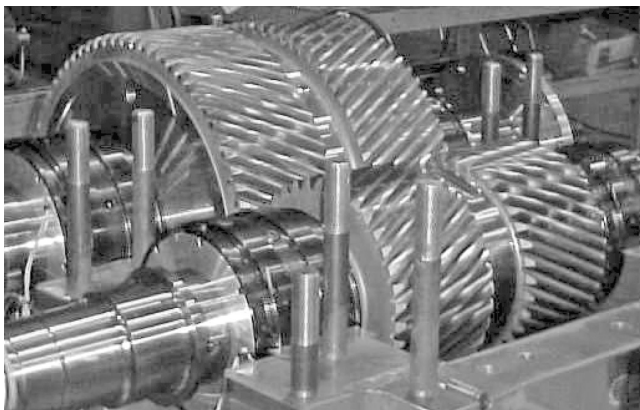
Double-Helical Gearset Used in a Gas Turbine–Compressor Drive.
